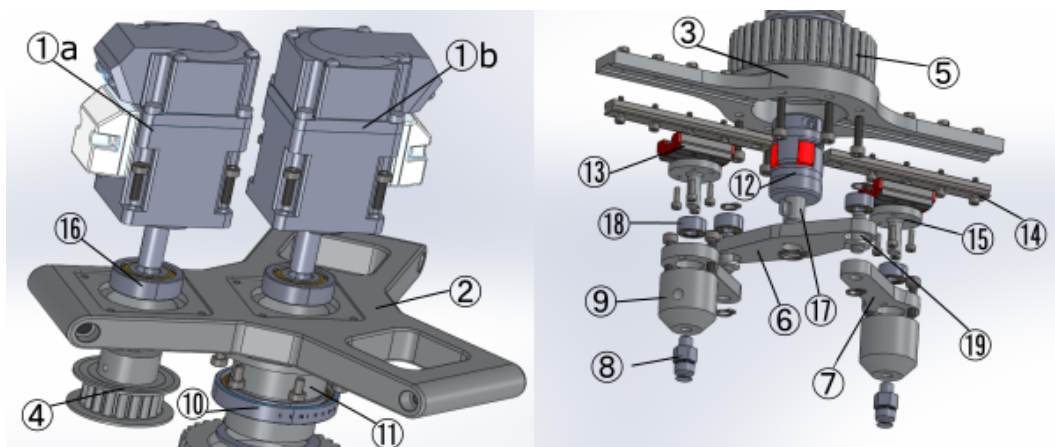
Components of the 2-DOF gripper in an exploded view.
